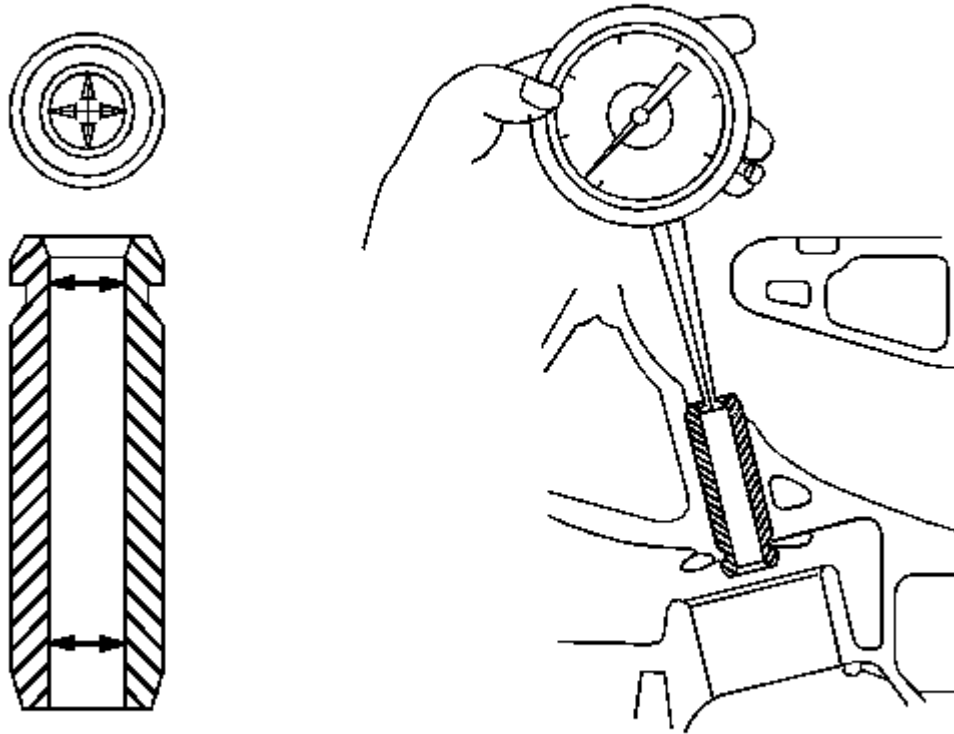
Measuring Inside Diameter Of The Guide Bush Using Caliper Gauge
